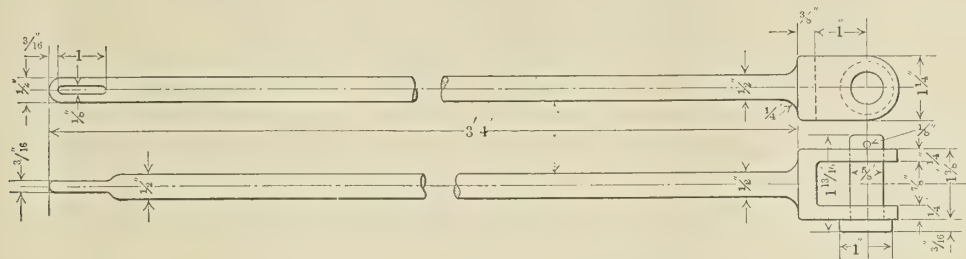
GUIDE ROD FOR L. P. ENGINE. MAKE ONE OF MILD STEEL.
